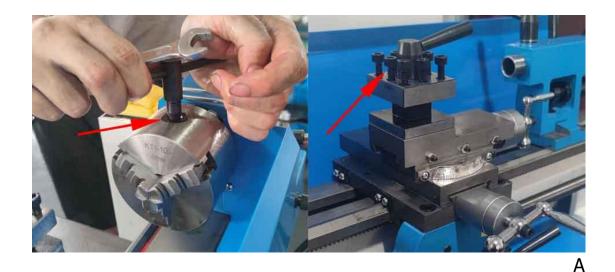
Replacement of Jaws Fig.2 Composite tool rest adjustment
